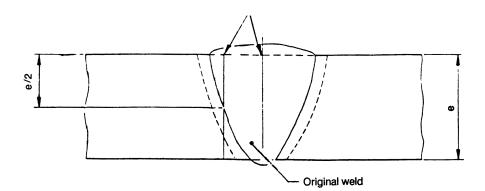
Position of Crack Tip Opening Displacement Specimen Notch for Assessing Original Butt Weld or Full Penetration Repair Weld.
